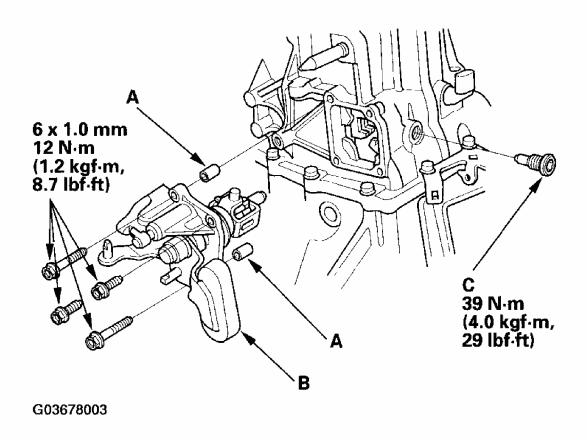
Installing 8x14mm Dowel Pins And Change Lever Assembly With Specified Torques
